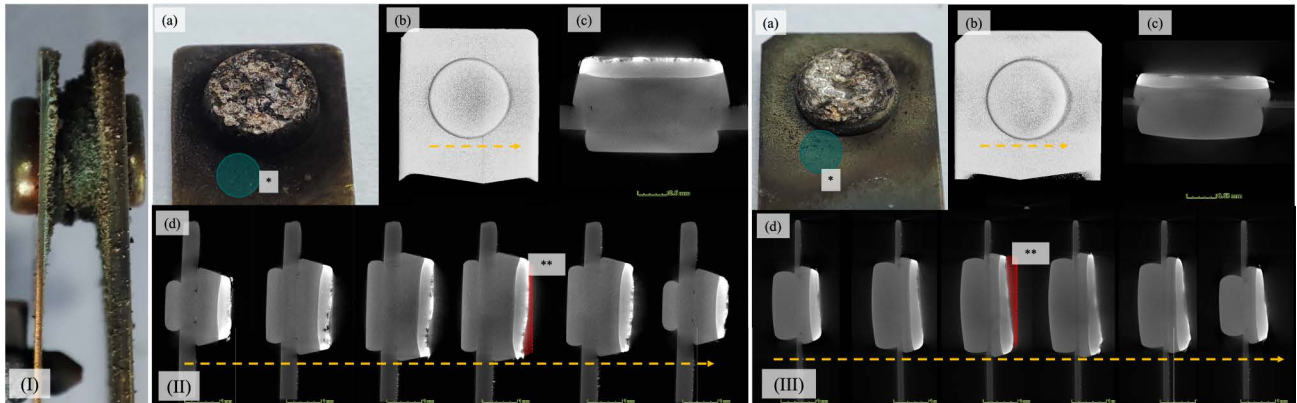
(I) Example of stuck-closed EMR contacts (unsealed), due to contact welding; (II) (a) photograph of the static contact carrier (anode) after failure; (b), (c) and (d) CT-Scans and cross-sections (the brighter coloured grey area on the contact rivet is oxidised silver and the silver contact plating material, while the darker grey area is the copper contact rivet body); (*) sputtered, eroded contact material; () dashed red line represents the contact height of the new EMR contact; (III) photograph and CT-Scan of the moving contact carrier (cathode) after failure, cf. (II).
